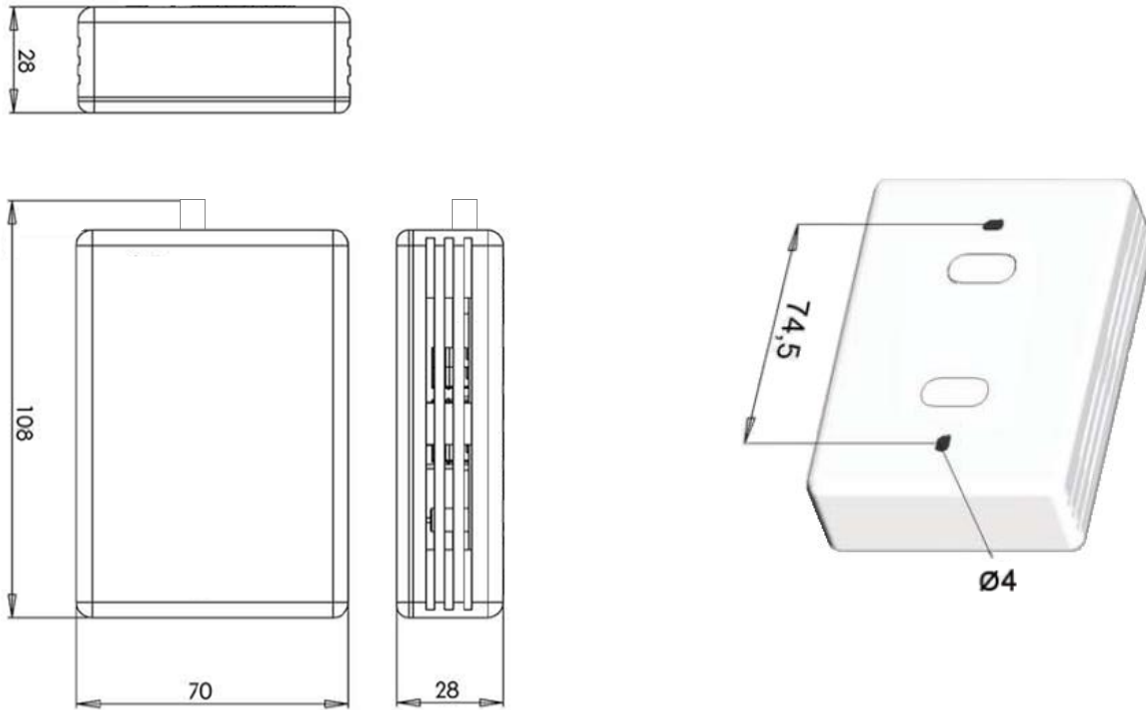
IntesisBox[®] device dimensions in mm and back view with fixing holes
